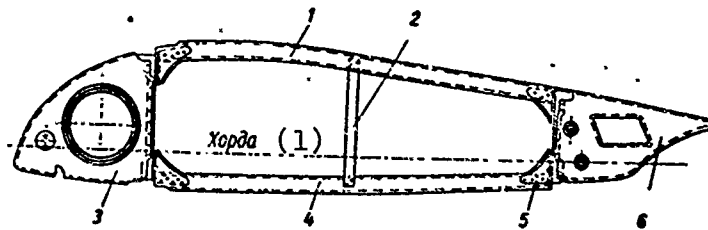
Standard rib: 1 - upper flange; 2 - strut; 3 - nose; 4 - lower flange; 5 - knee; 6 - trailing edge.
